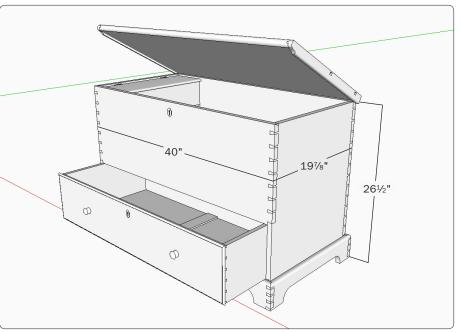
The final model, used to construct the blanket chest in the Matched Photo. Some dimensions changed very slightly in the course of developing the model.
